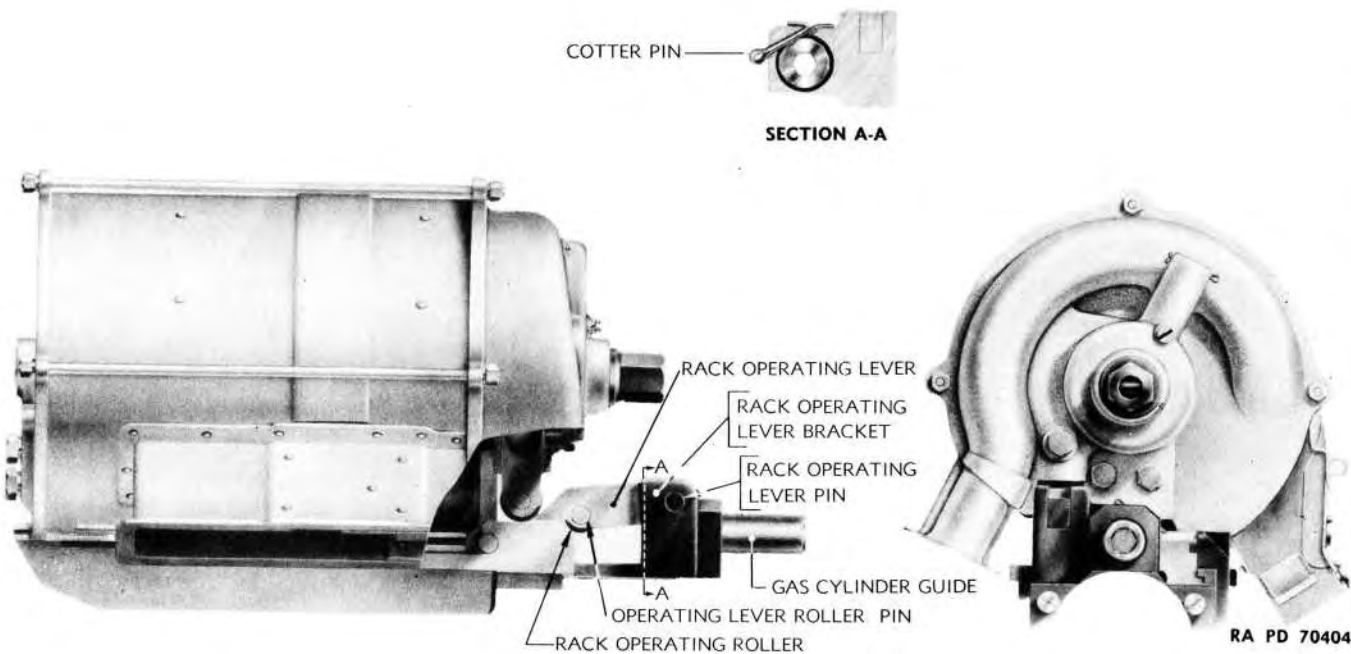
20-MM Feed Mechanism AN-M1 and Charging Cam Assembly
